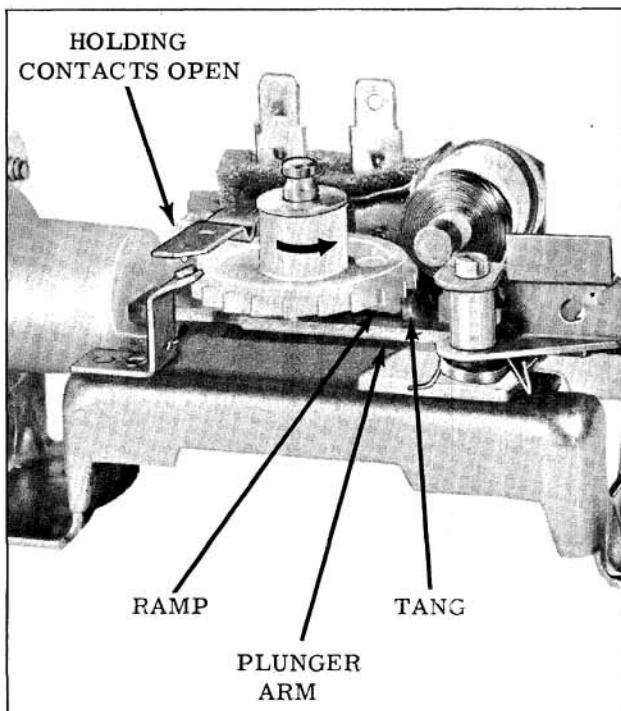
Pump Lockout Position (Pump Parts Idling)
